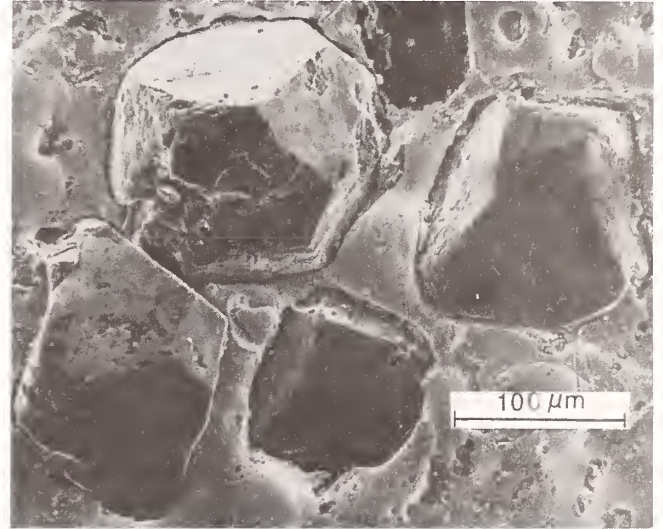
Surface of a diamond grinding wheel after ED trueing.
